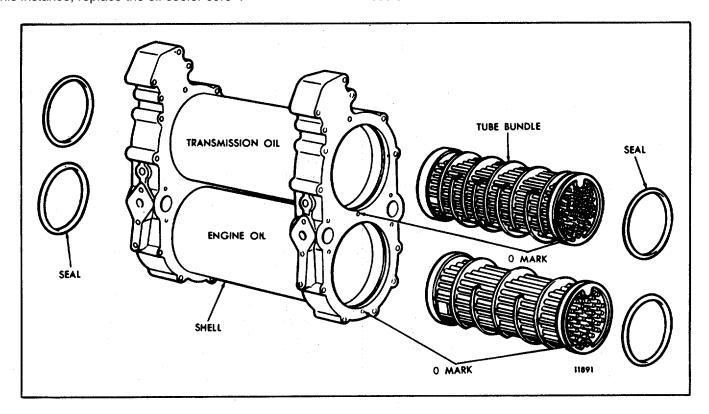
Tube-Type Oil Cooler (Removable Bundles) and Relative Location of Parts
